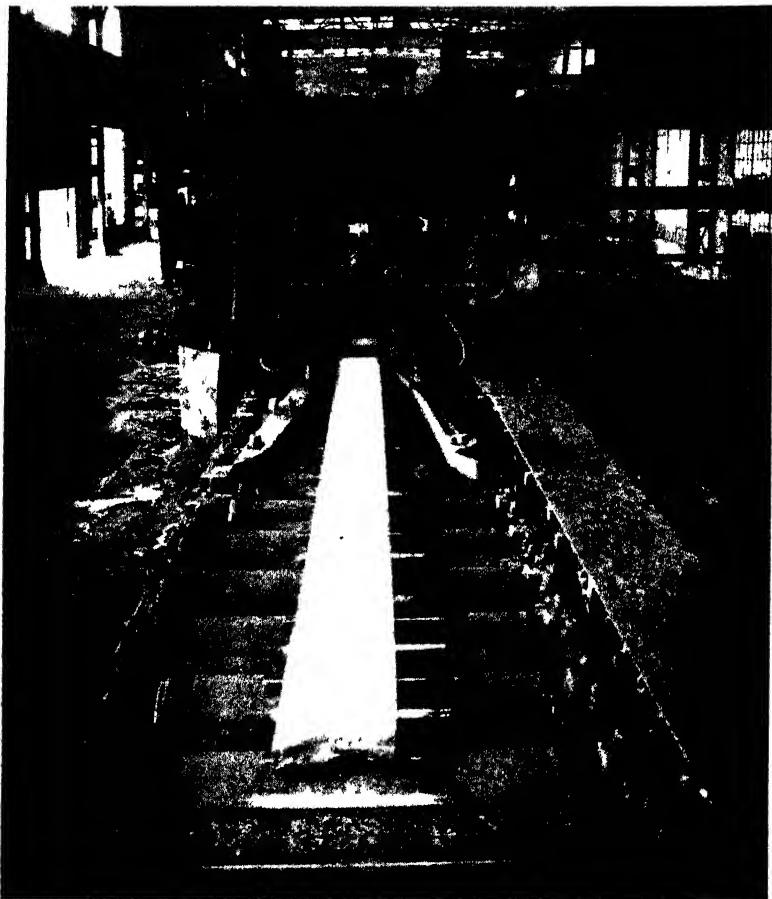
Universal mill. (*Courtesy of Bethlehem Steel Corp.*)
